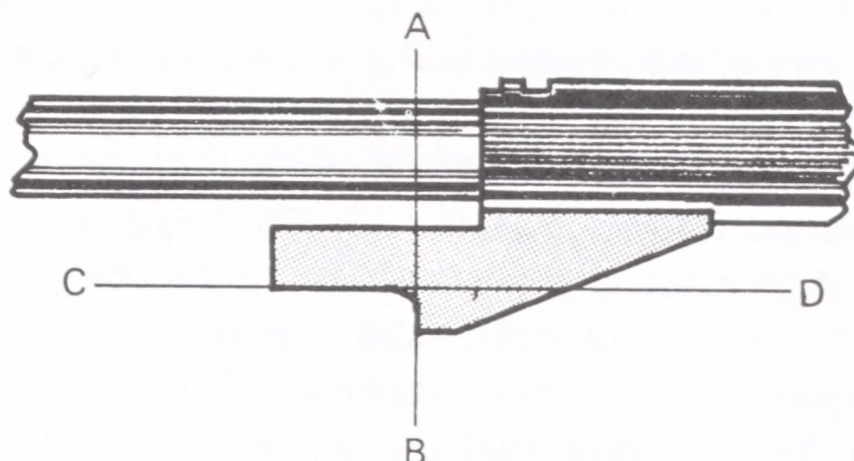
If you should remove too much bearing surface on the sear, you can increase the trigger pull weight by deepening the notch in the cocking piece following the line AB and CD.
